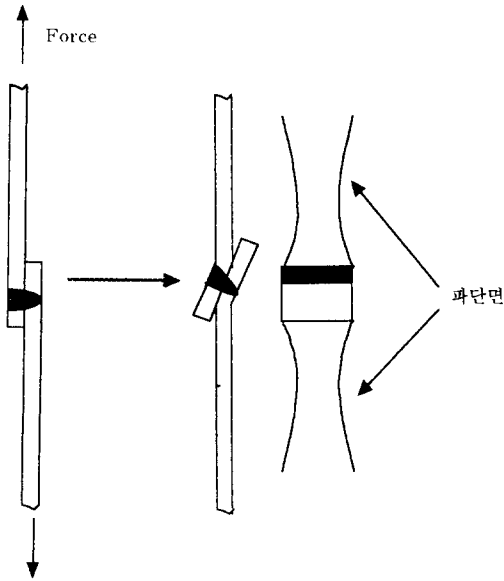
Fracture behaviour of lap welded specimen
